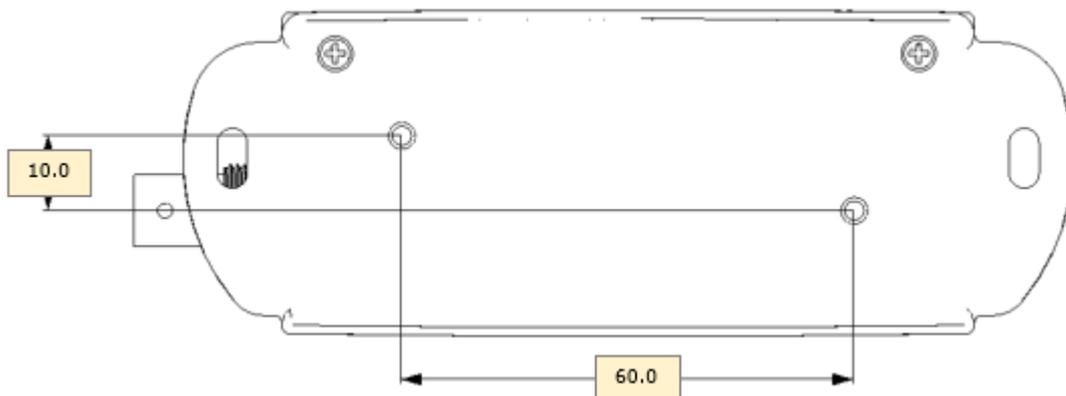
LDSBus Dissolved Oxygen Sensor Adapter Dimension – Bottom View
